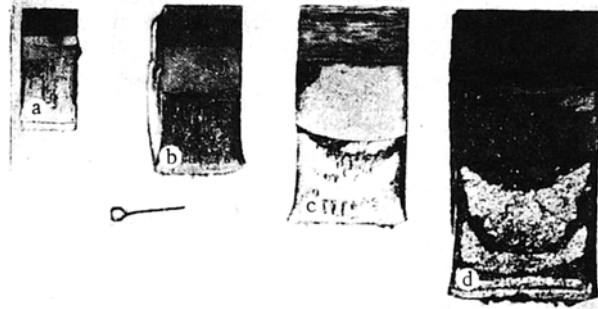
Fracture surfaces of specimens with a thickness of 10 mm (a), 14 mm (b), 20 mm (c), and 26 mm (d) after tests at room temperature.
